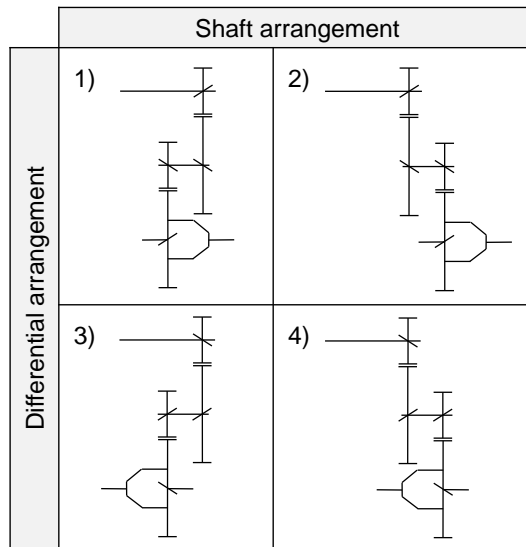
Schematic illustration of possible shaft and differential arrangements for a single-speed, two-stage, helical gearbox
